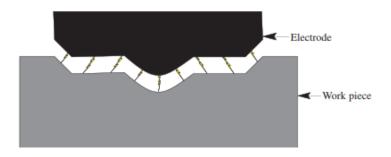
Ram EDM used to create cavity on the workpiece.
